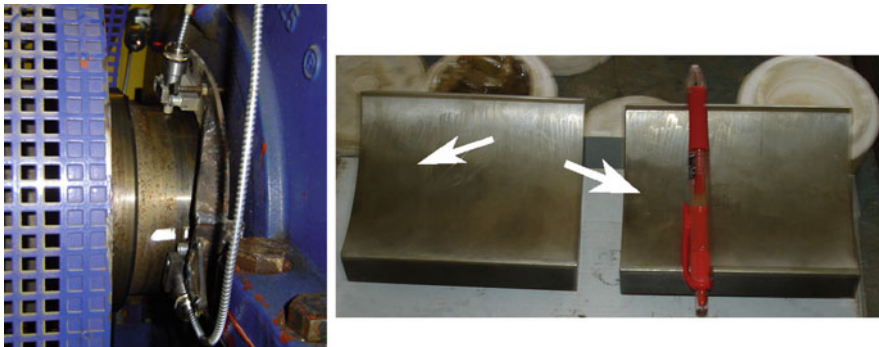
The BR at 7th bearing vibration displacements peak-to-peak values s_{p-p7X}, s_{p-p7Y} and gaps-radial clearances $\Delta 7X, \Delta 7Y$ measurement set with two sensors 7X and 7Y and damaged pads
